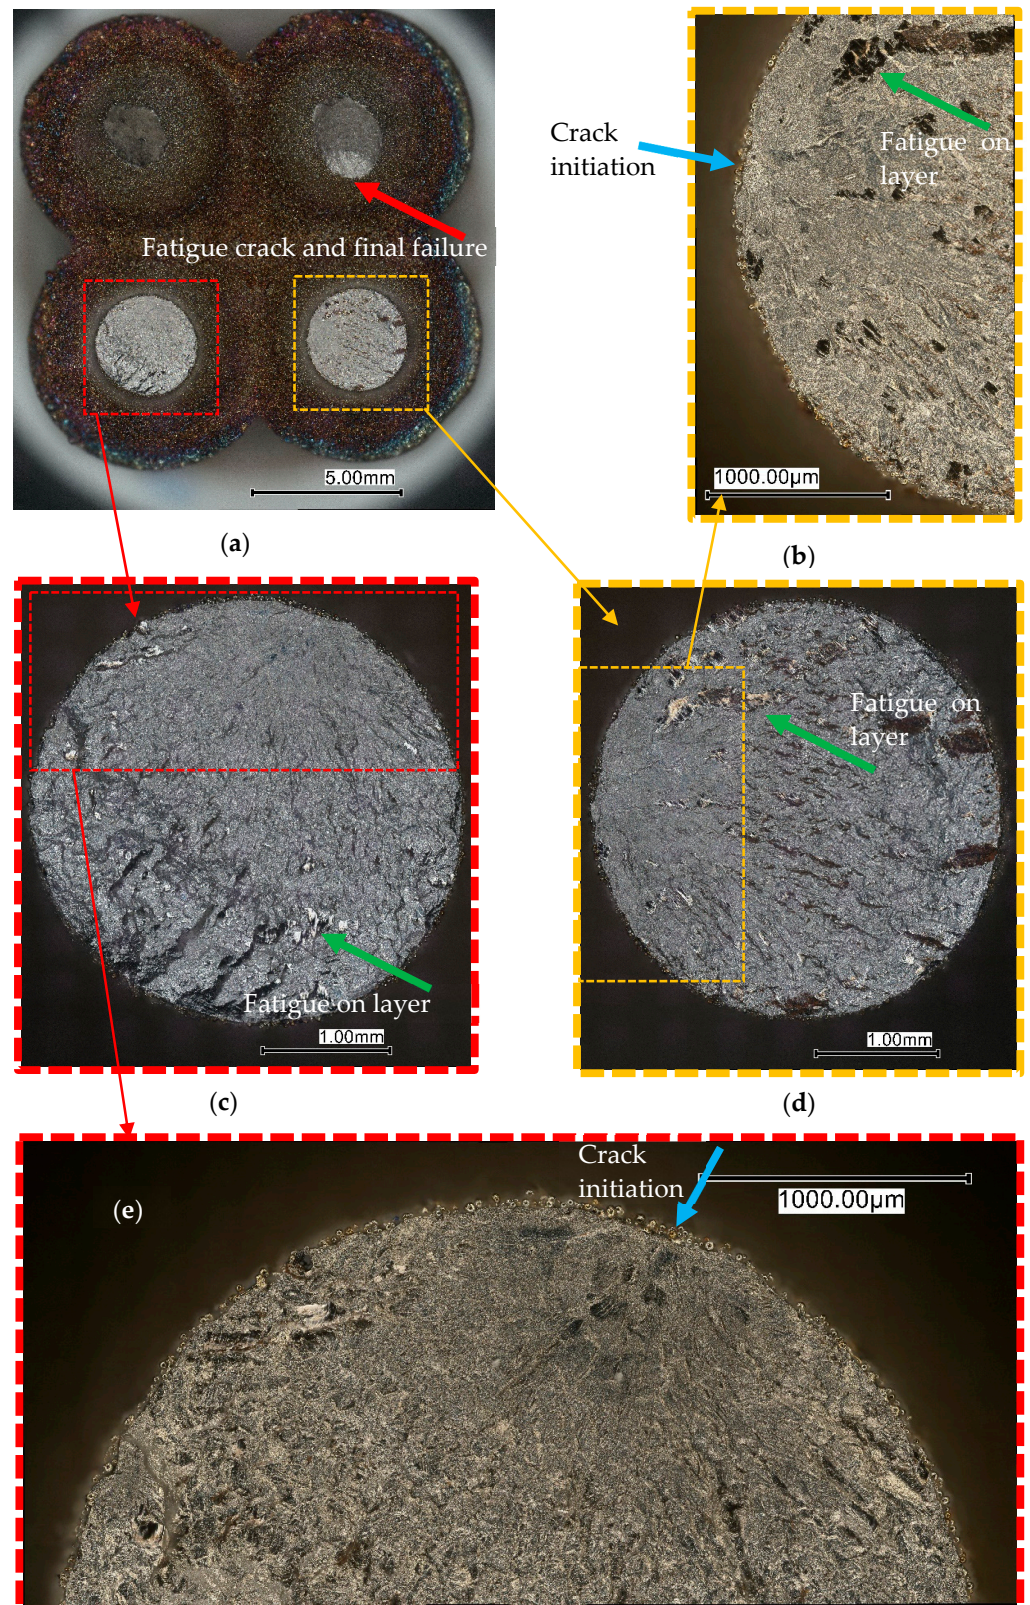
Fracture surface of the N4 geometry tested at a maximum stress level of 280 MPa: (a) fracture surface after the fatigue test, (b) the first fatigue crack initiation site, (c) the second rod fracture surface, (d) the first rod fracture surface, (e) the second rod fatigue crack initiation side. The red arrow in (a) shows details in (c), while the yellow arrow in (a) shows details in (d). The red arrow in (c) shows the detail in (e) where the fatigue crack has initiated.
